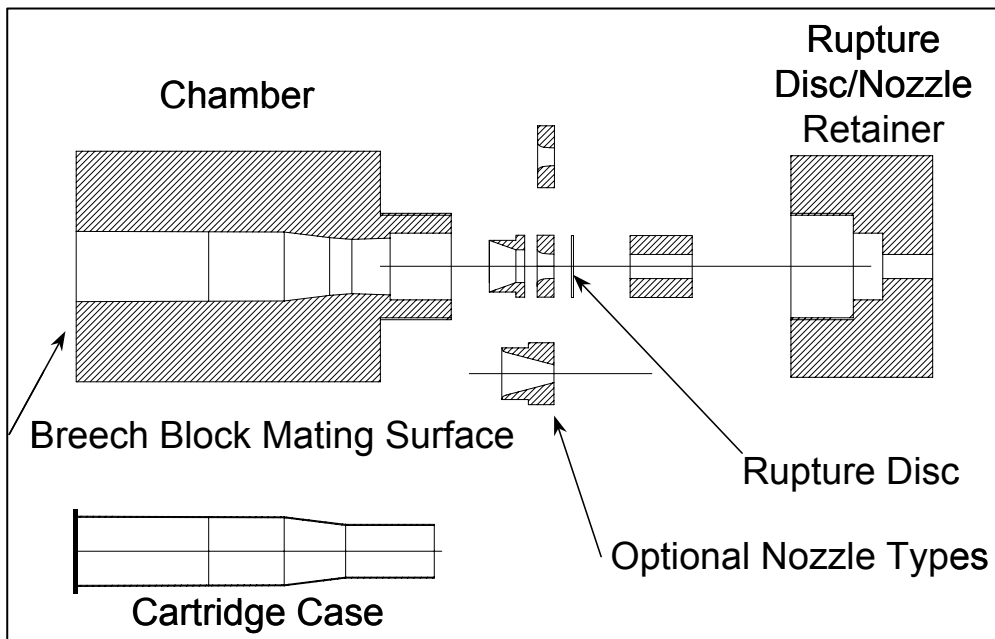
Drawing of an ARL 37-mm erosion fixture.
